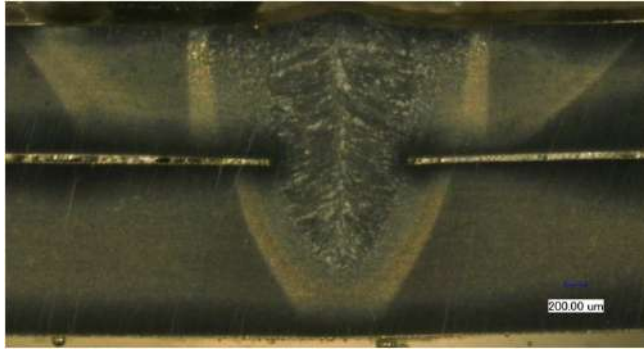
Cross-sectional view of the weld obtained under a scanning speed of 30 mm/s and a defocused off-set distance of 62 mm (the preheating and welding laser power is 4.0 kW; the welding speed is 60 mm/s)
